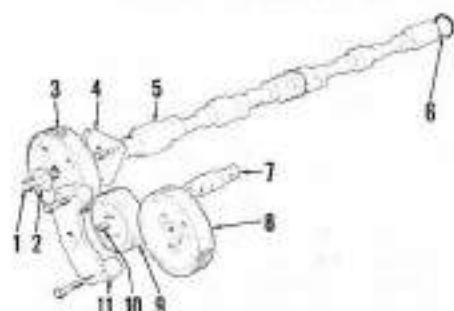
Exploded view of four-cylinder engine camshaft, idler gear and fuel injection pump drive gear.
